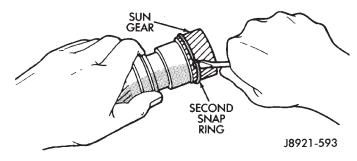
Removing/Installing Second Snap Ring ASSEMBLY
